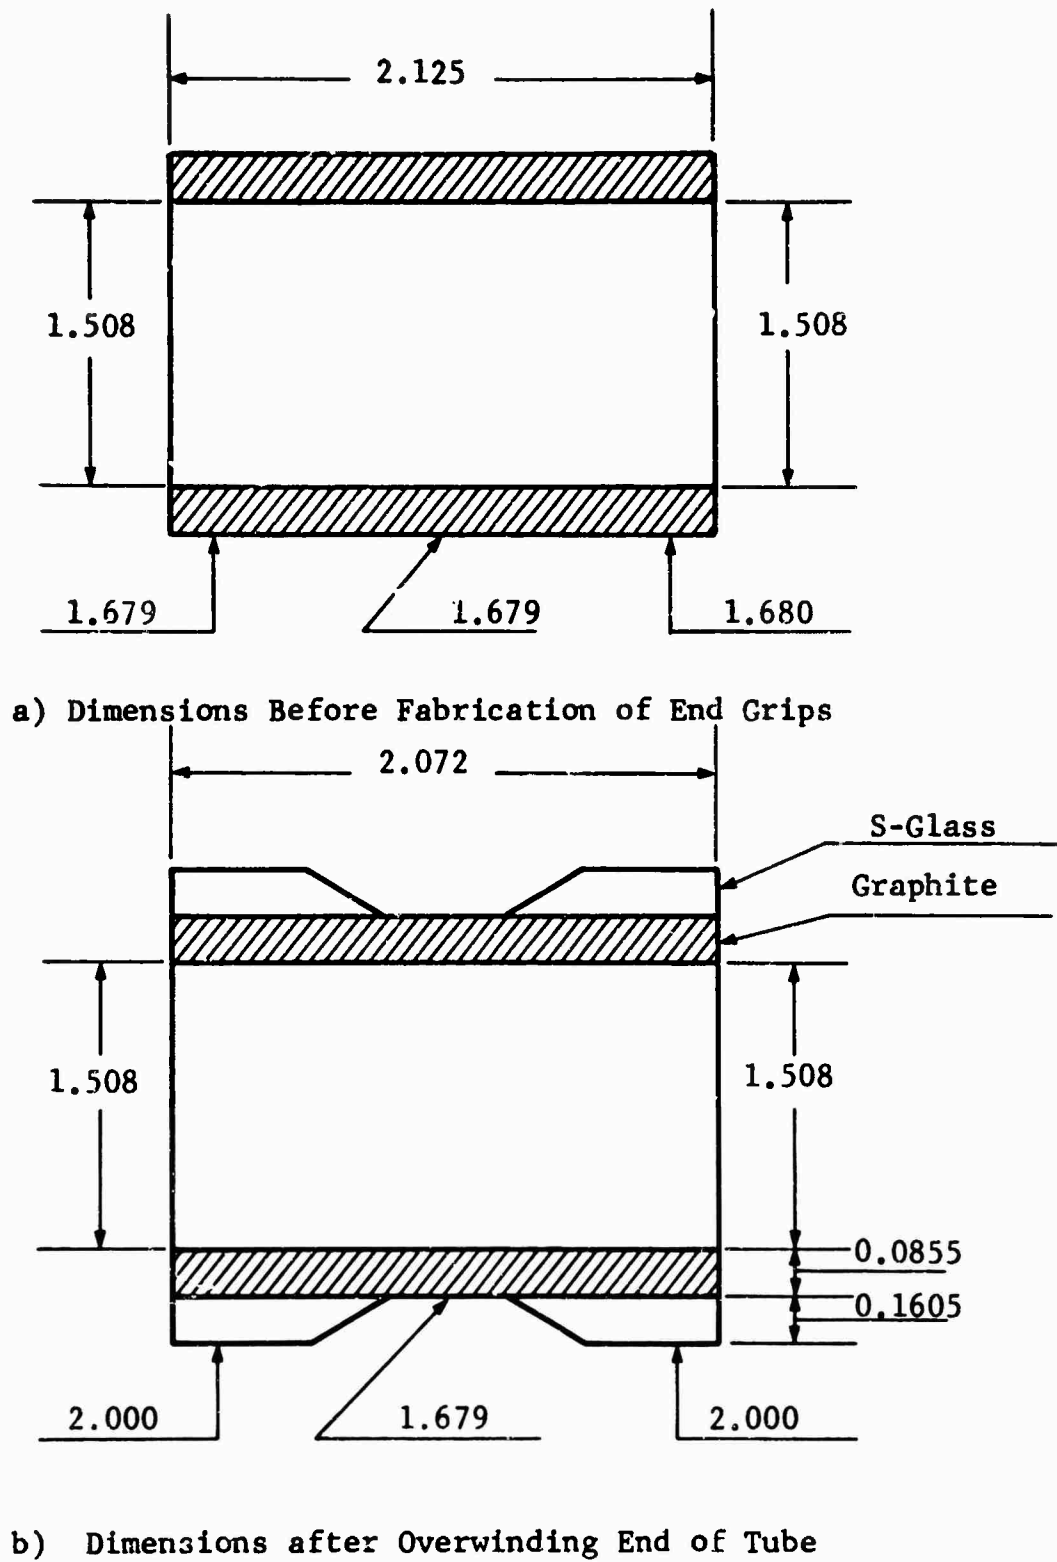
FABRICATION OF CARBON-FILAMENT TORSIONAL FATIGUE SPECIMEN
